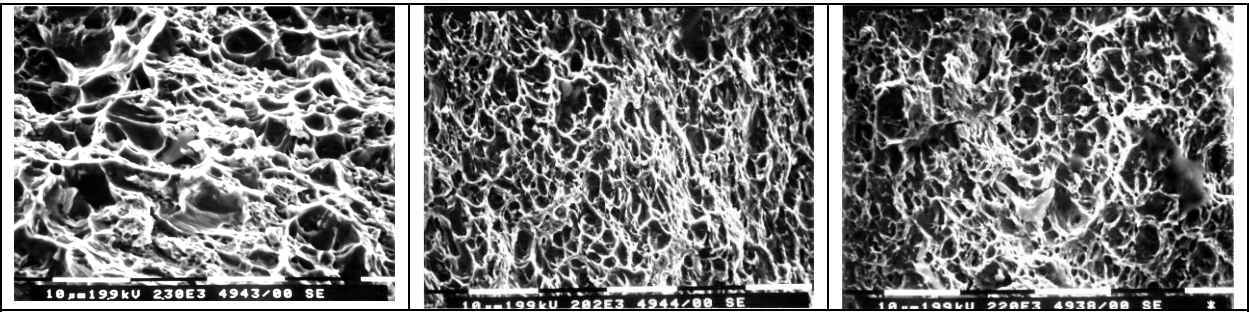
Ductile fracture for HAZ at 97°C for 9.3 mm/s, 12.3 mm/s and 15.3 mm/s welding speeds.
